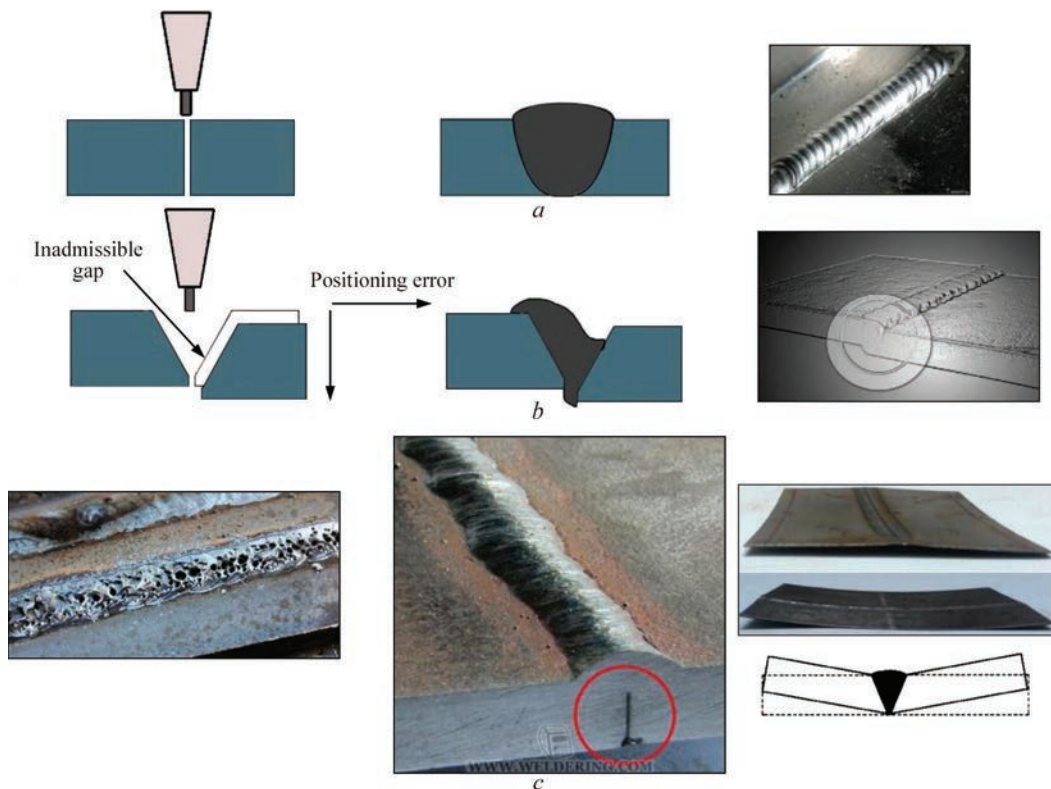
Common welding defects, which can be eliminated using AI and welding process automation: a — ideal position of the welded joint; b — mismatch of welded joint position; c — defects (porosity, incomplete penetration, deformation)
